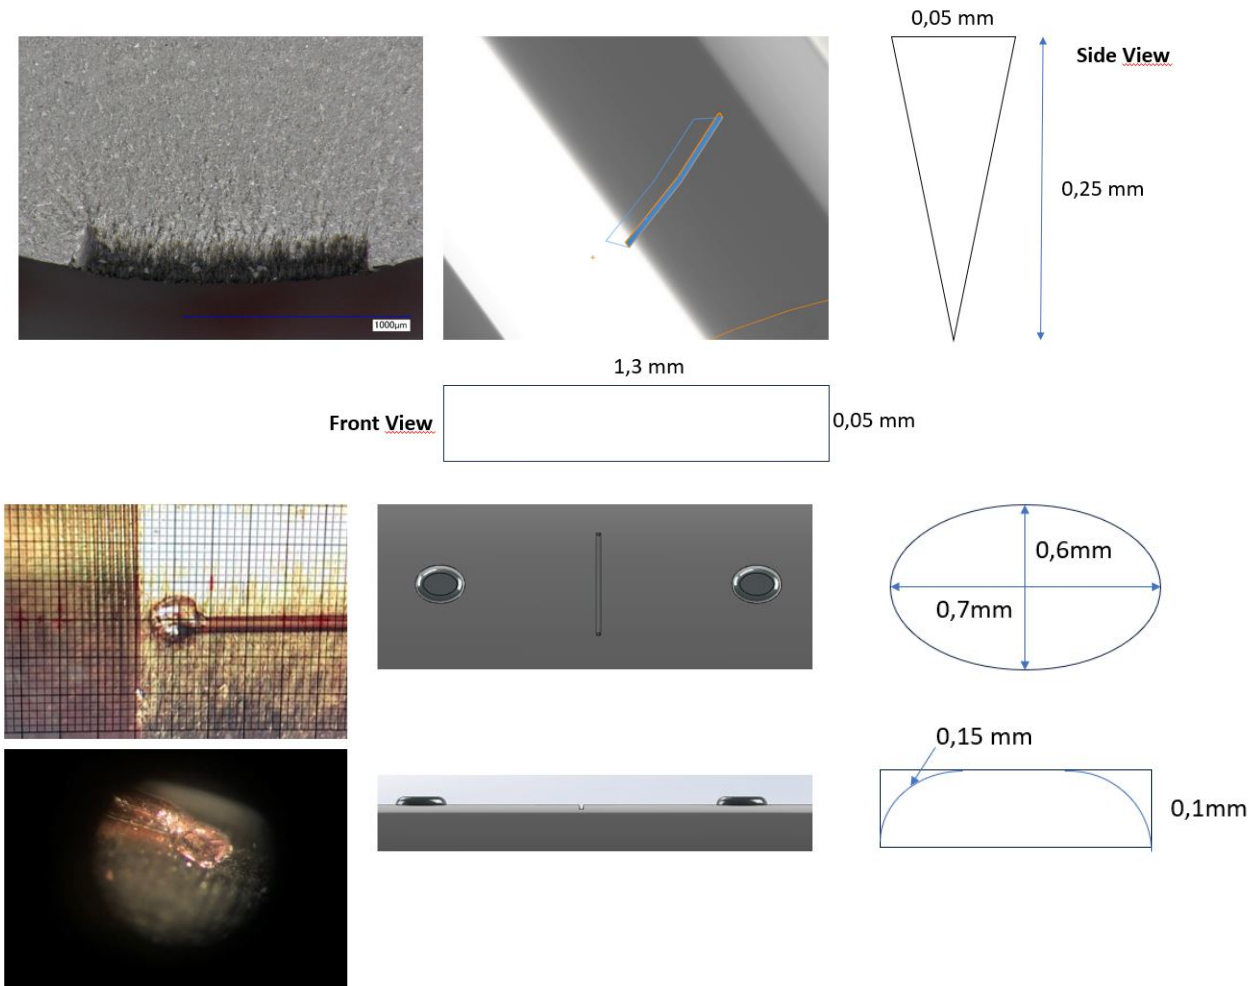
Secondary notch and Welding spot 3D geometry
